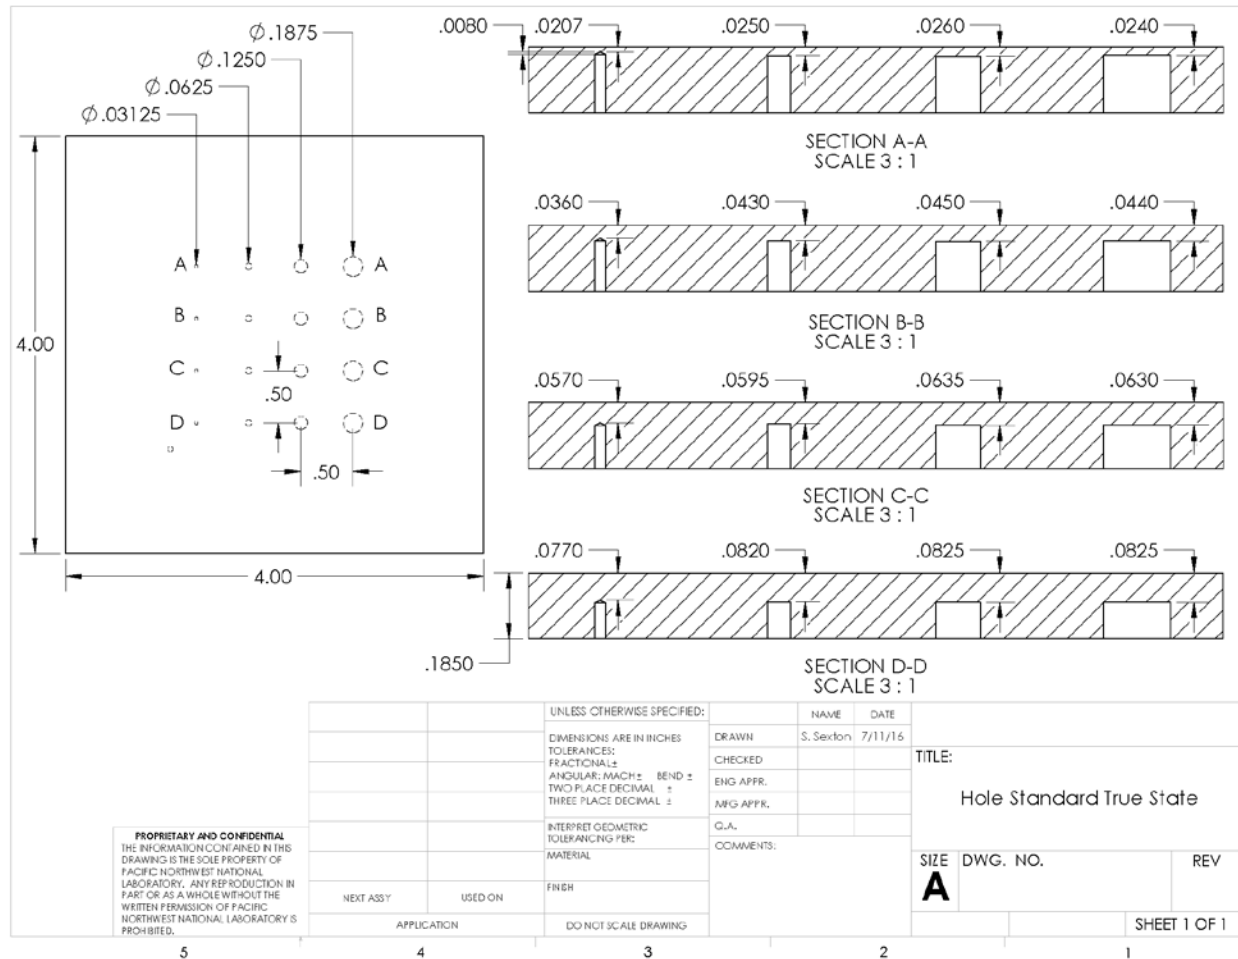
Design Drawing of the Bottom-Drilled Hole Plate with As-built Dimensions Showing Remaining Ligament
